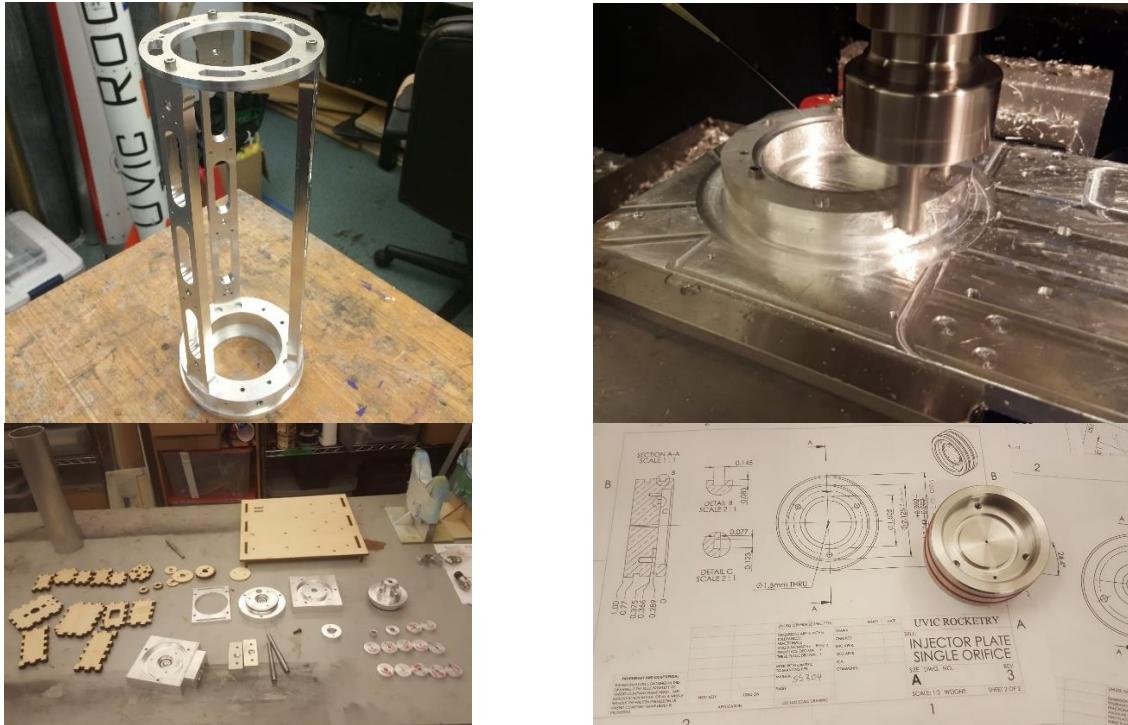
Some of the parts I machined for the team. These include parts for the rocket (motor mount) and other experiment equipment like the cold flow chamber and filament winding machine.
